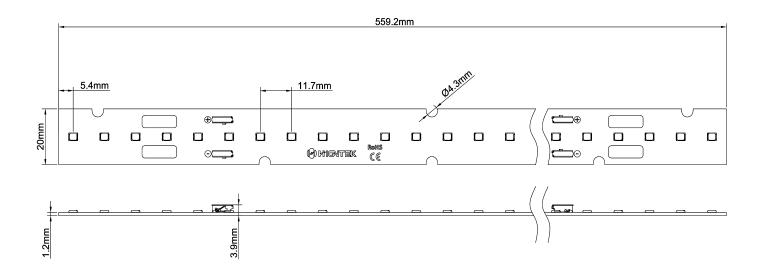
Mechanical Dimensions for HIGNTEK HUL-560SA-048048.
